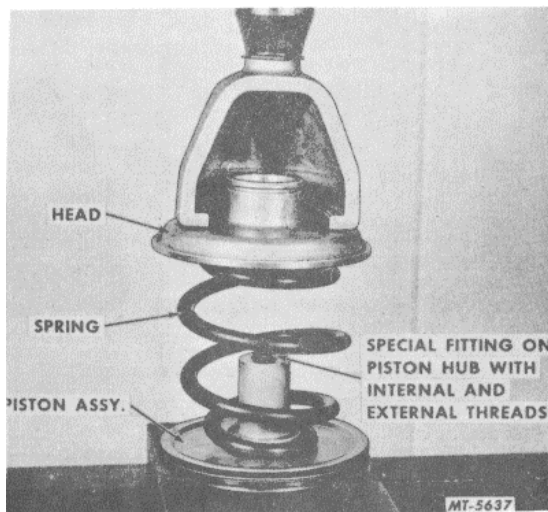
Head, Spring and Piston Assembly with Press Relaxed.
